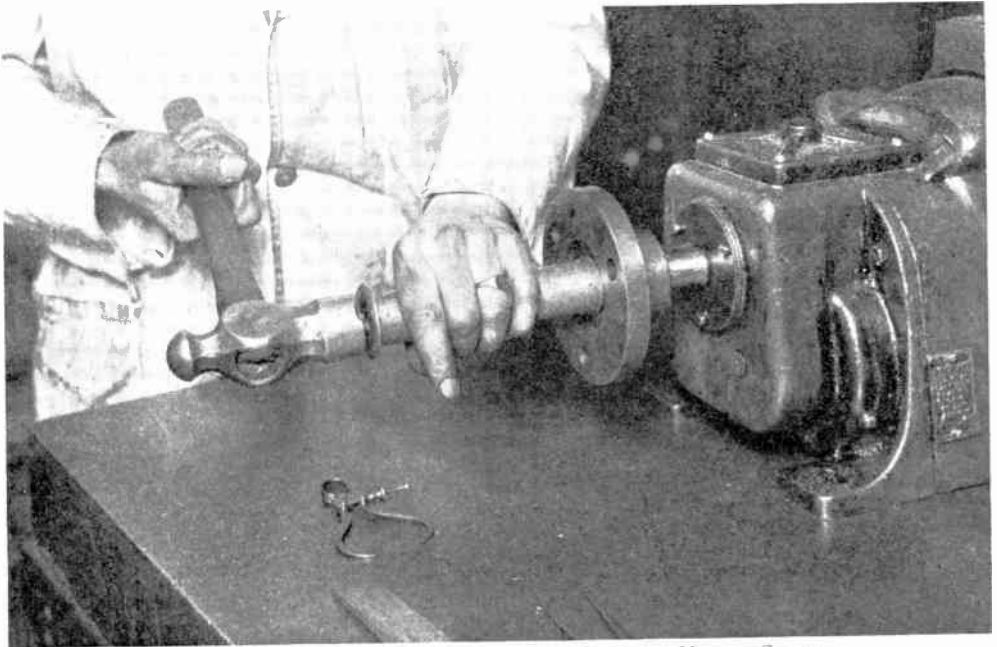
FITTING A COUPLING TO A GEARED MOTOR SHAFT.
